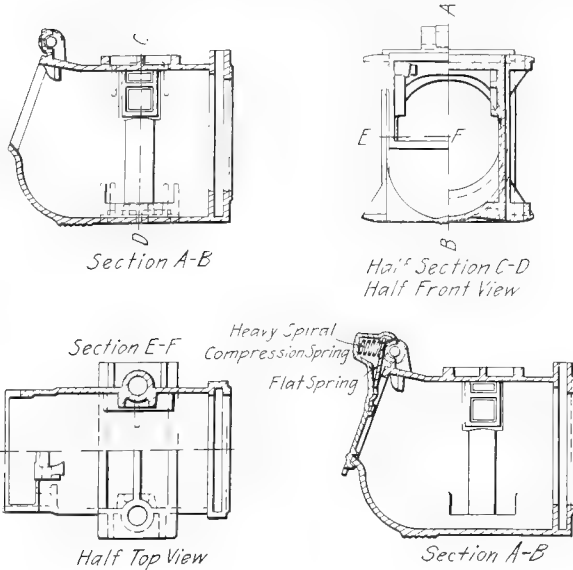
Cast Steel Journal Box for 6 in. by 11 in. Journals. Buckeye Steel Castings Company.
